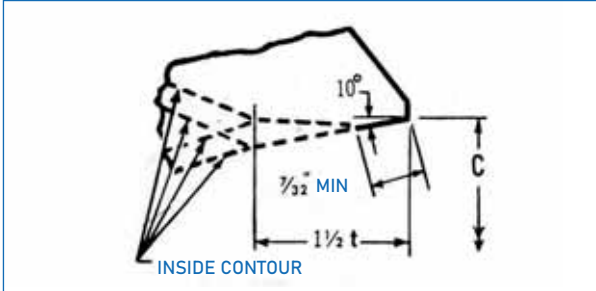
Welding End for Continuous Tapered Backing Ring (Inside Contour).
